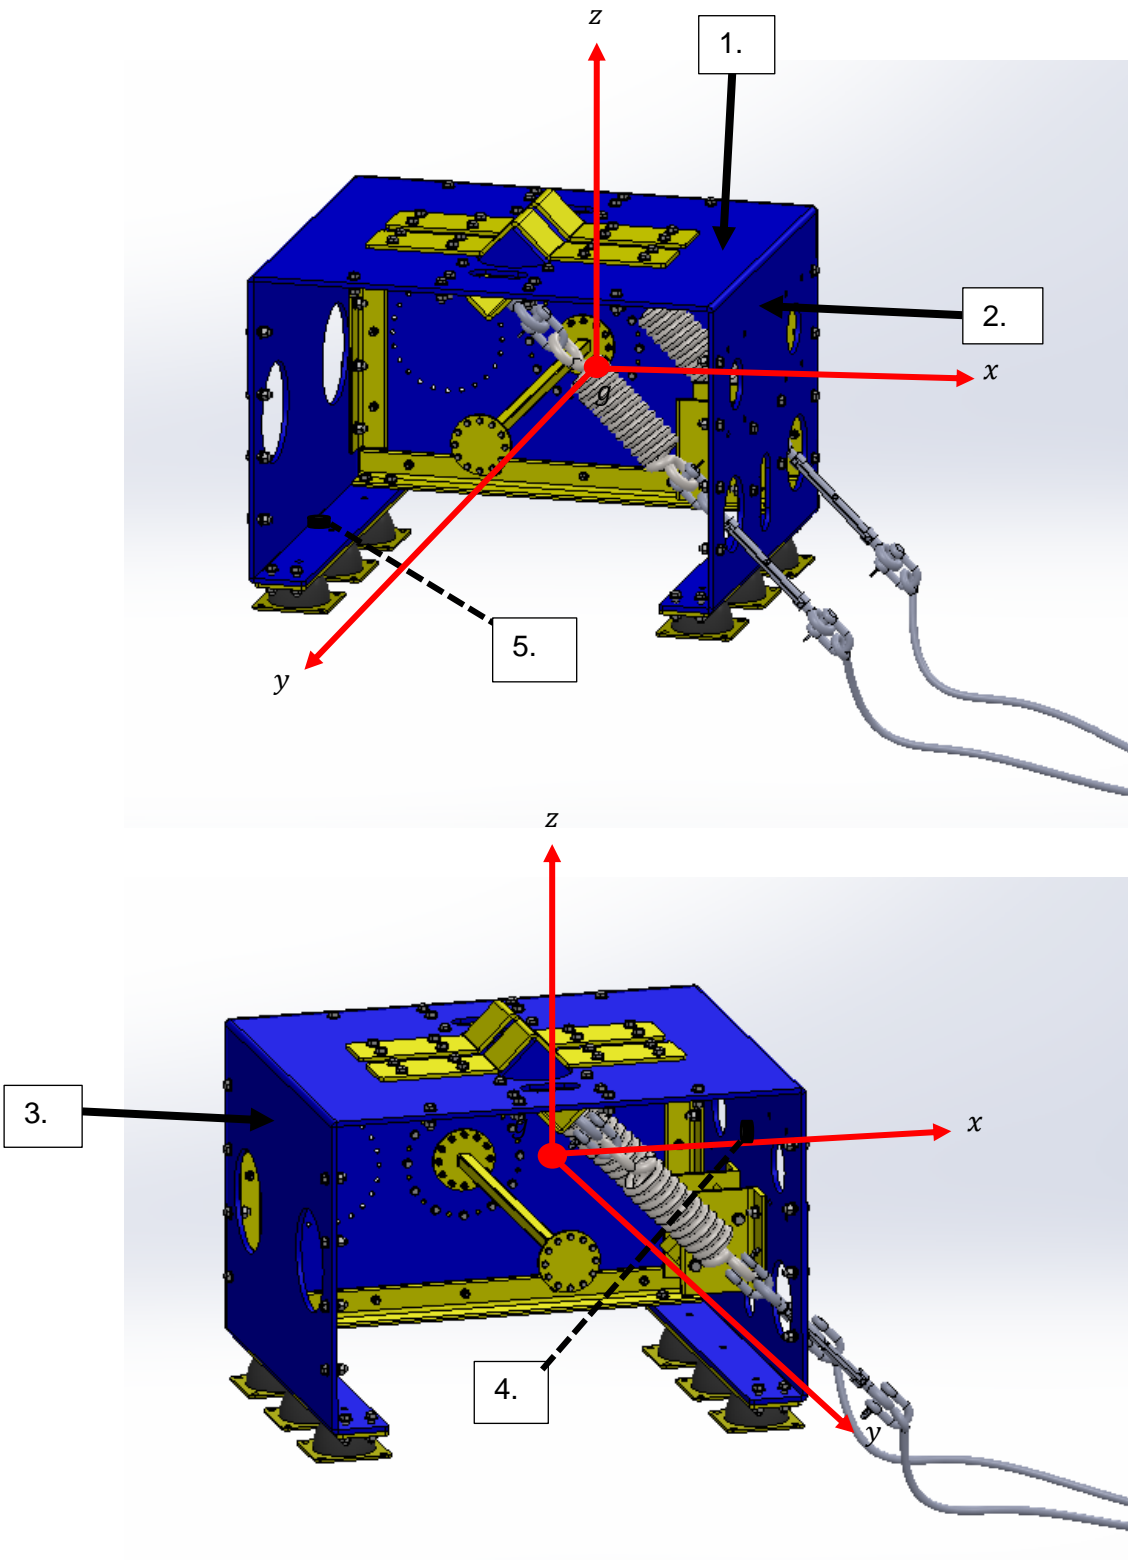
Representation of the machine with the cables attached and the side of the machine removed.
